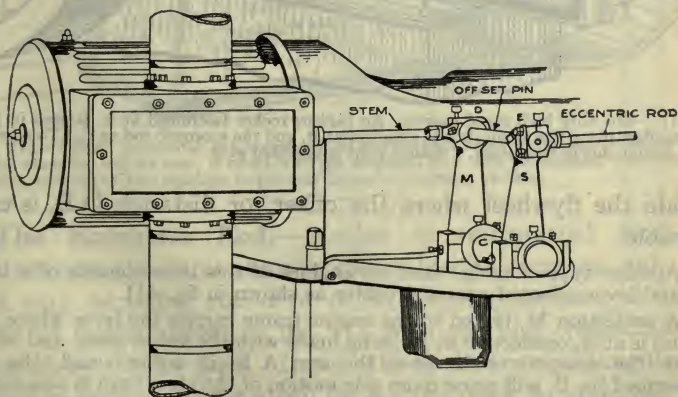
The American-Ball engine. View showing rock shaft C, and rocker levers M, S, which carry the offset pin, the latter being attached at D and E.
